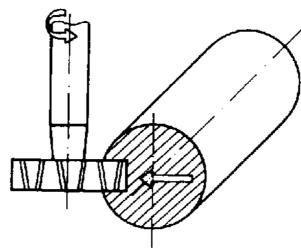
Groove in shafts Rectangular groove in plane surfaces
